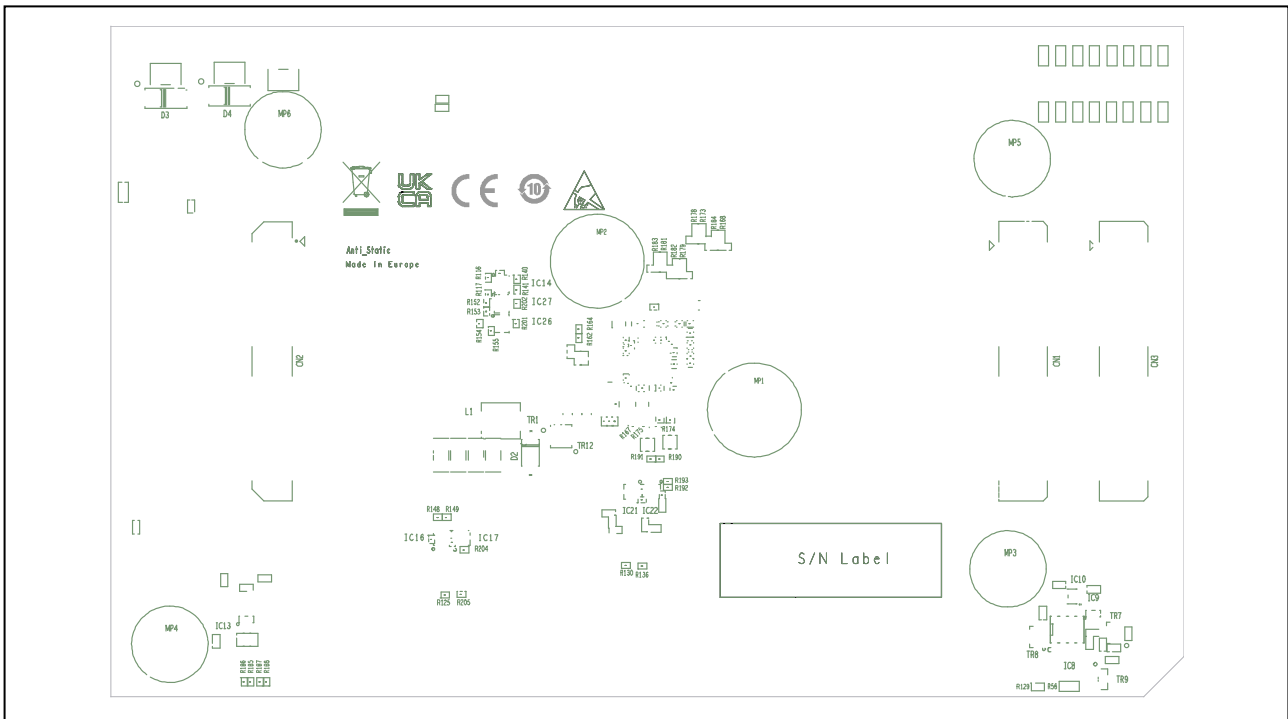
D018567_06_V02 Placement of connectors on bottom side
